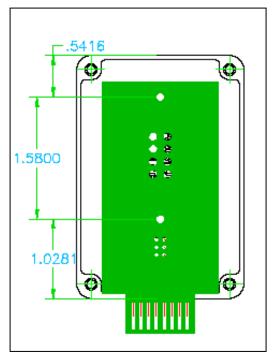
(q) Design for standoff to mount sensor PCB in the box
